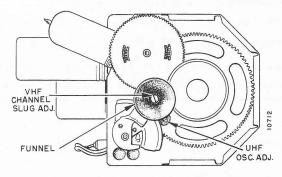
Front View of VHF-UHF Tuner Showing Location of VHF Channel Slug Adjustments.
